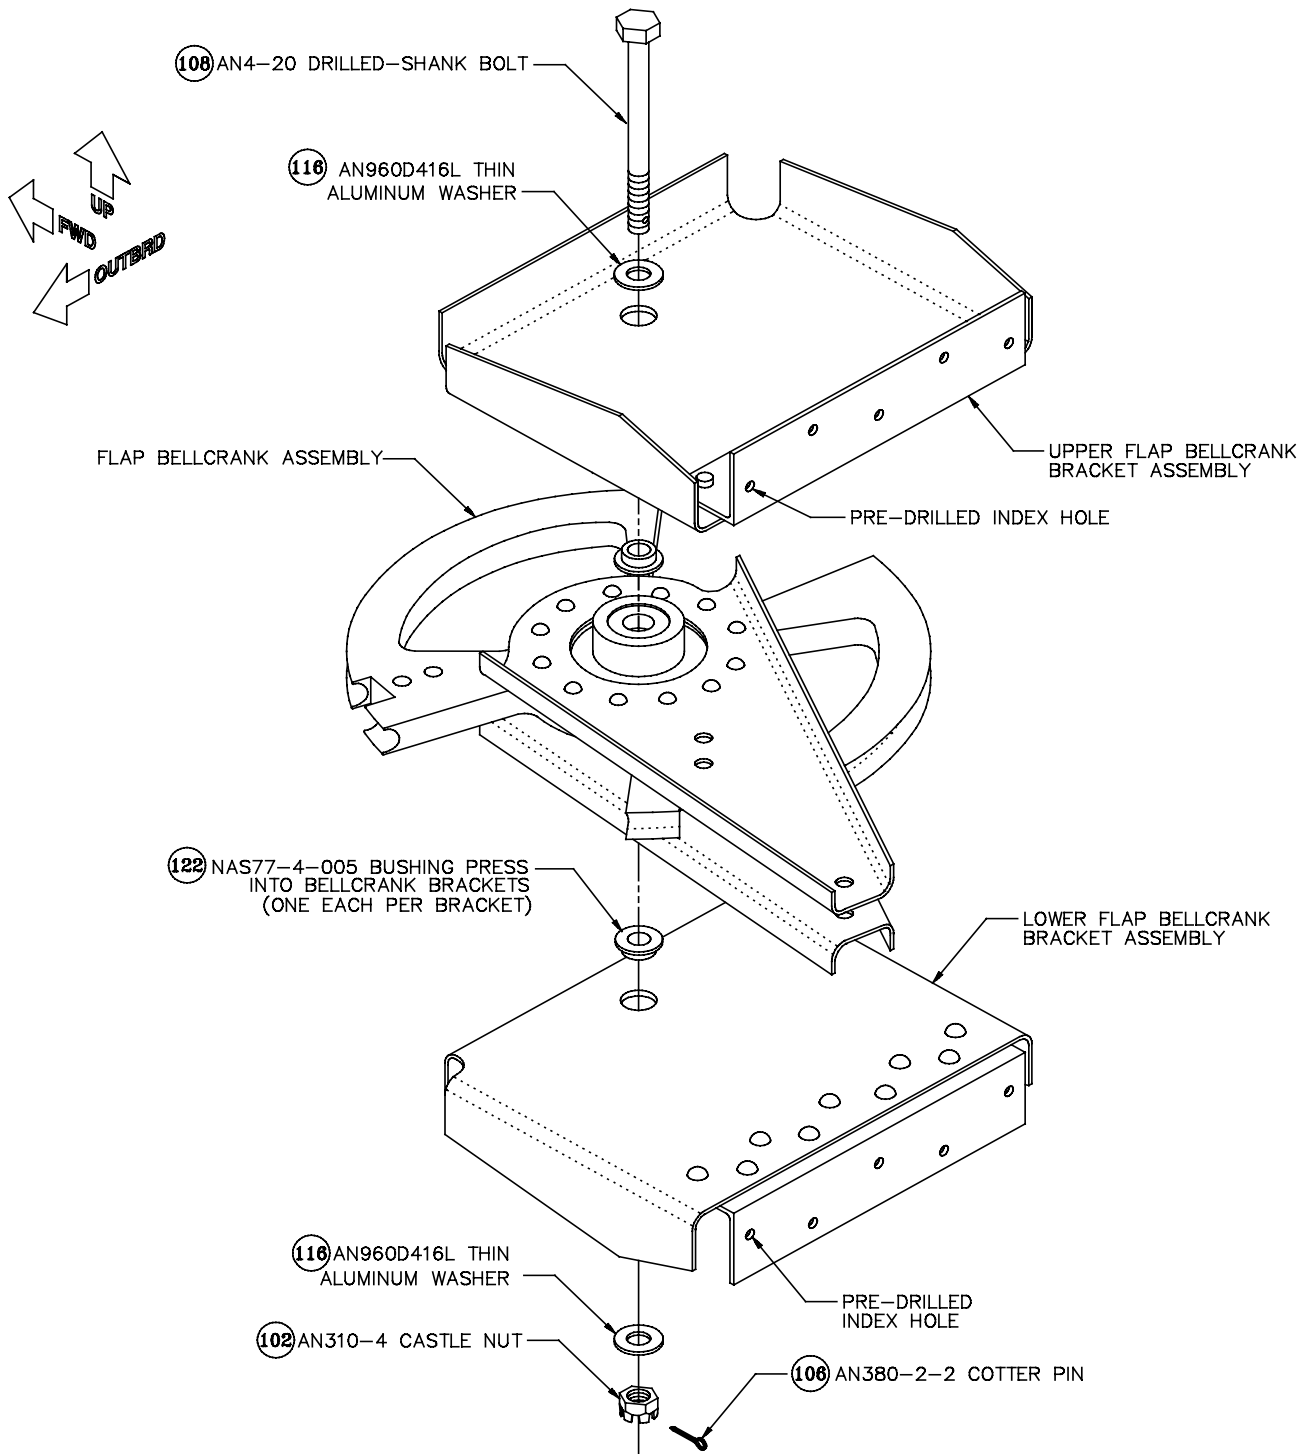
Mounting the Bellcrank Assembly Between the Bellcrank Brackets
